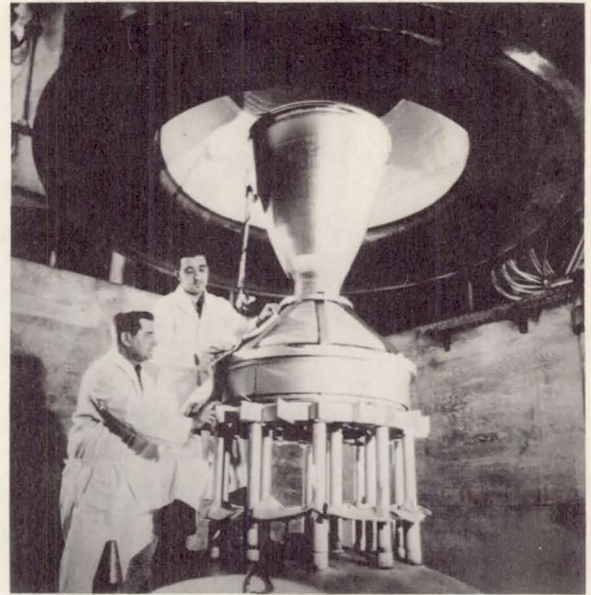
Completed KIWI chamber under vacuum retort. Furnace brazing.
